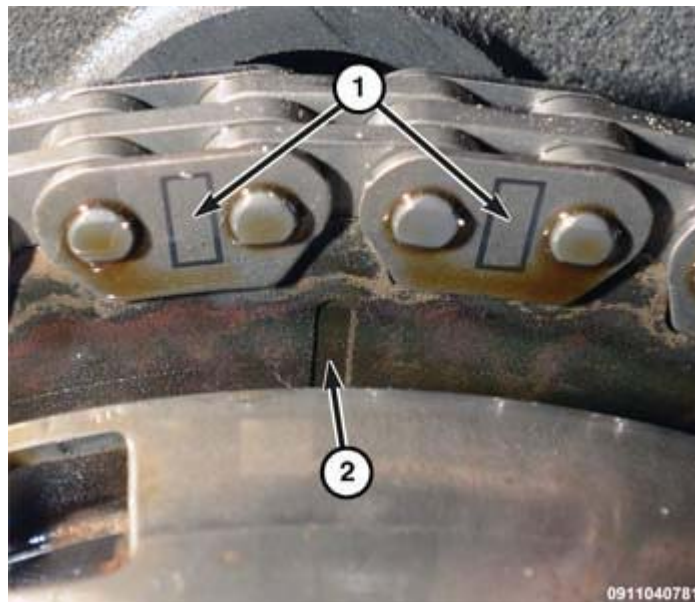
Aligning Timing Marks With The Timing Chain Sprockets
